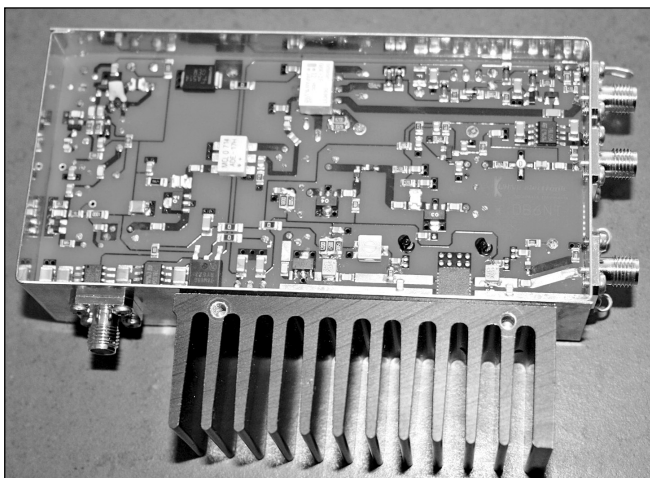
Surface mount component side of the PCB. The mixer, IF relay and FP31 output are readily identified
